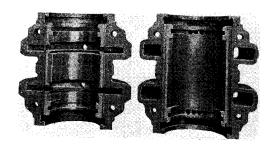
View of Top and Bottom Halves of a Typical Bearing, Showing Bearing Relief at the Splits and Babbitted Oil Ring Guides.
